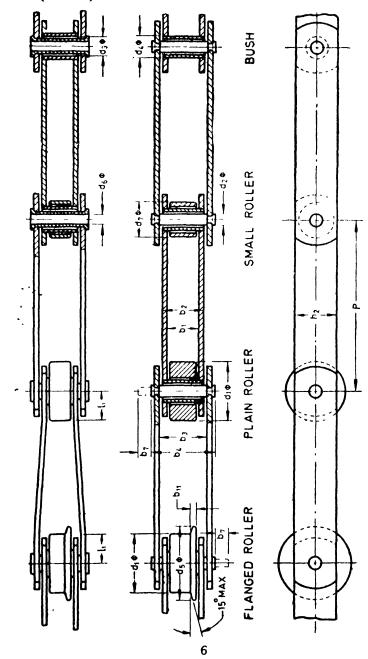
Dimensions for Solid Pin and Hollow Pin Conveyor Chains
